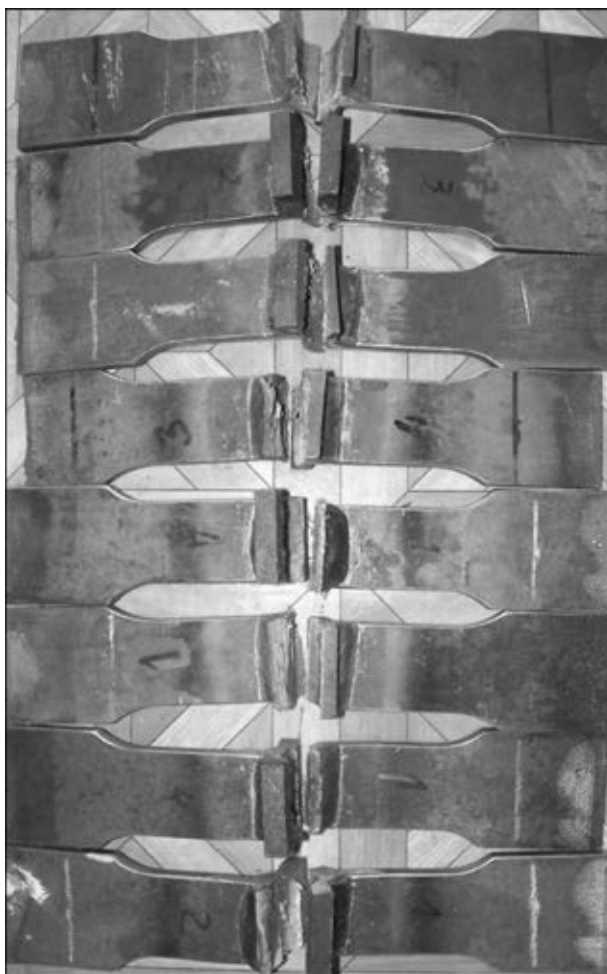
General view of welded T-joints with lack of root penetration which were strengthened by HFMP after fatigue tests
